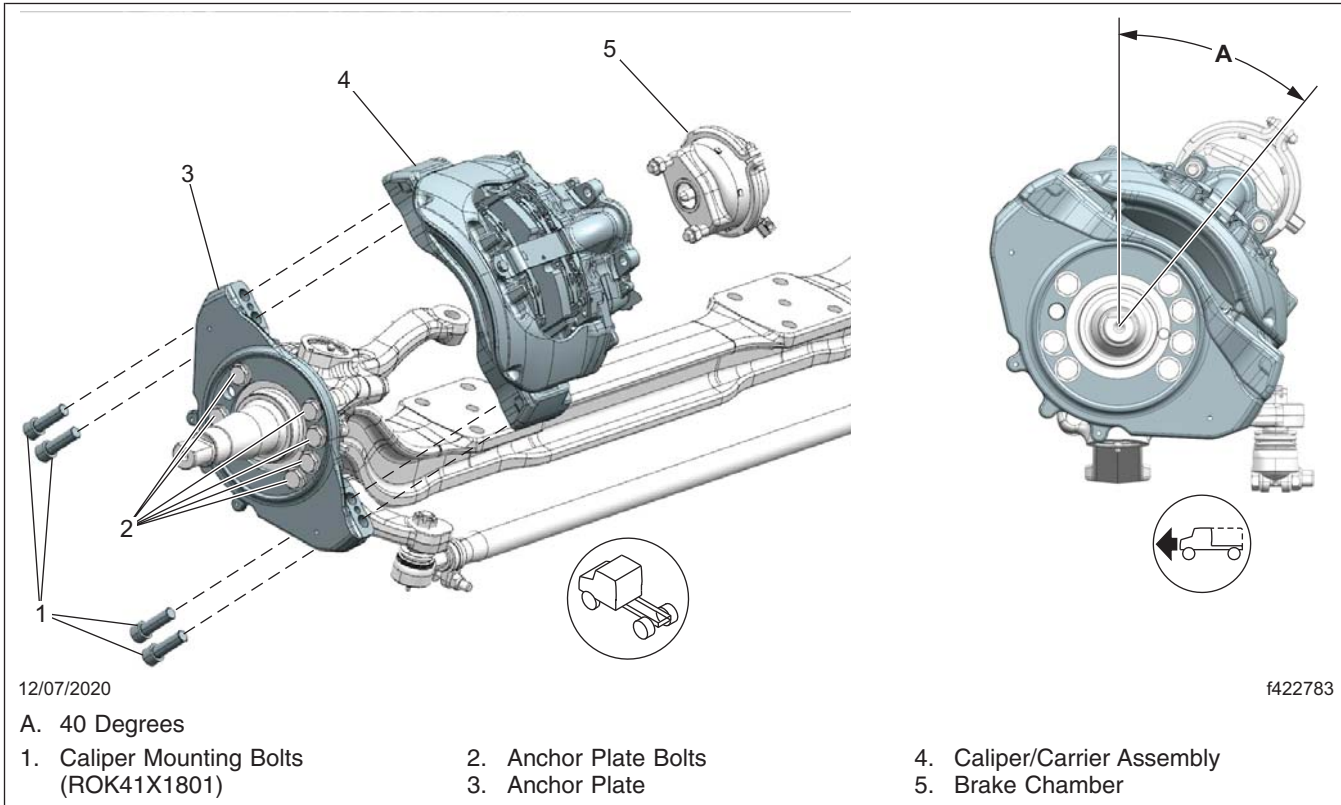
, Brake Calipers Mounted on New Anchor Plates
